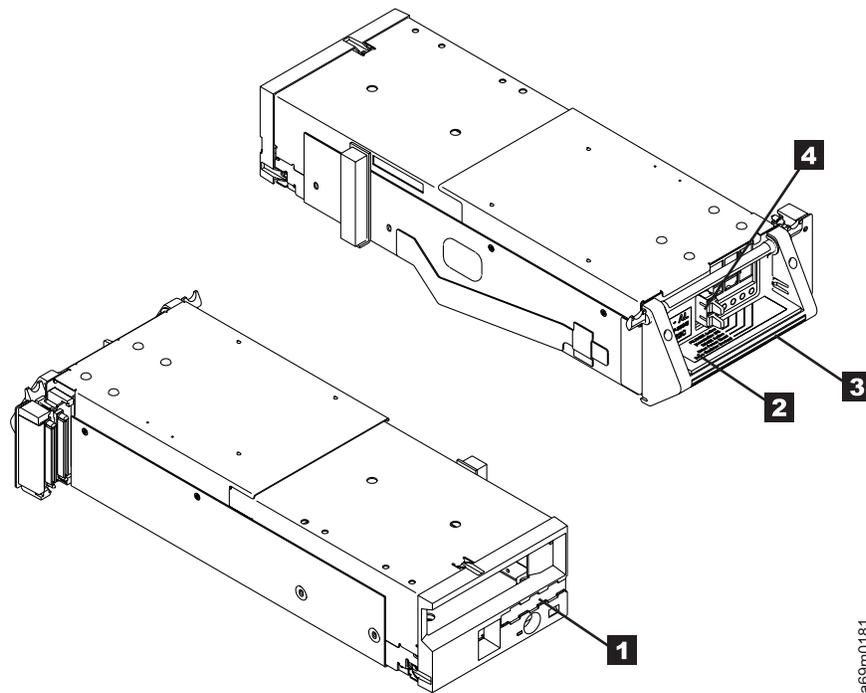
Removing and replacing a drive canister assembly - LTO fibre channel hot swap
